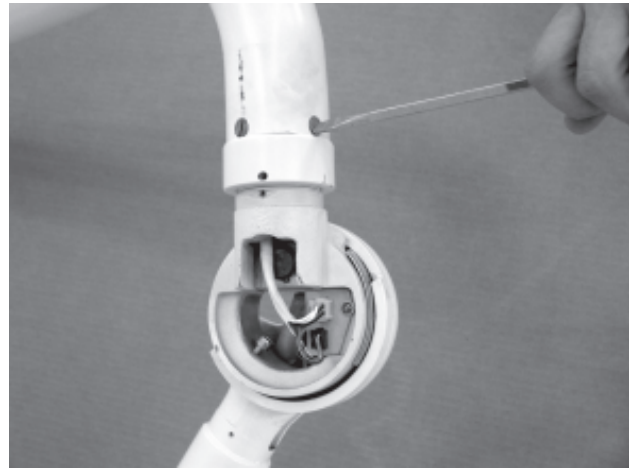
Adjust Support Arm/Spring Arm Brake Tension
